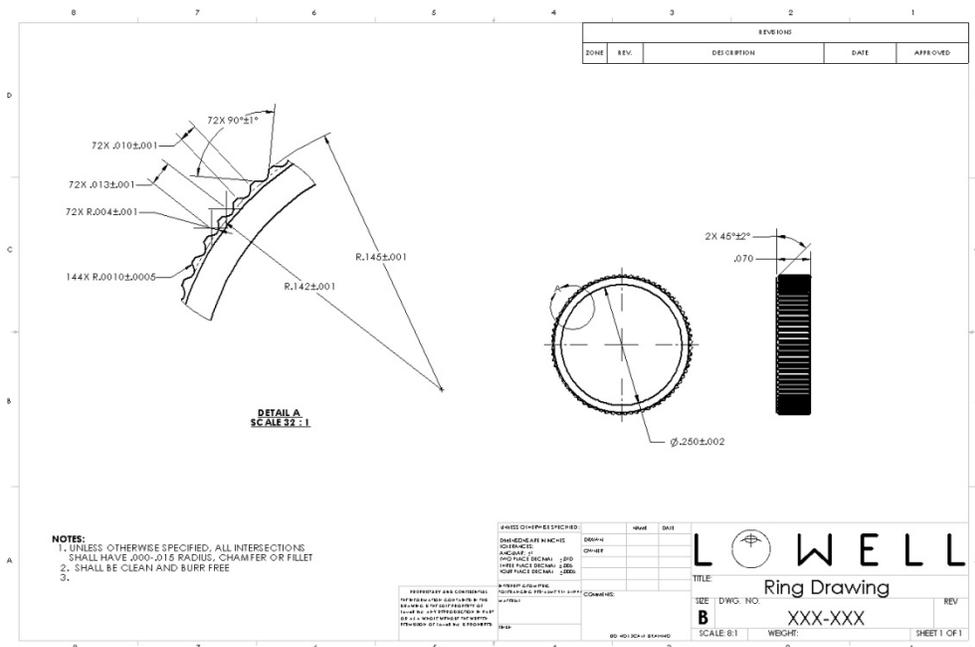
2D Orthographic Based Drawing (+/- Drawing)
